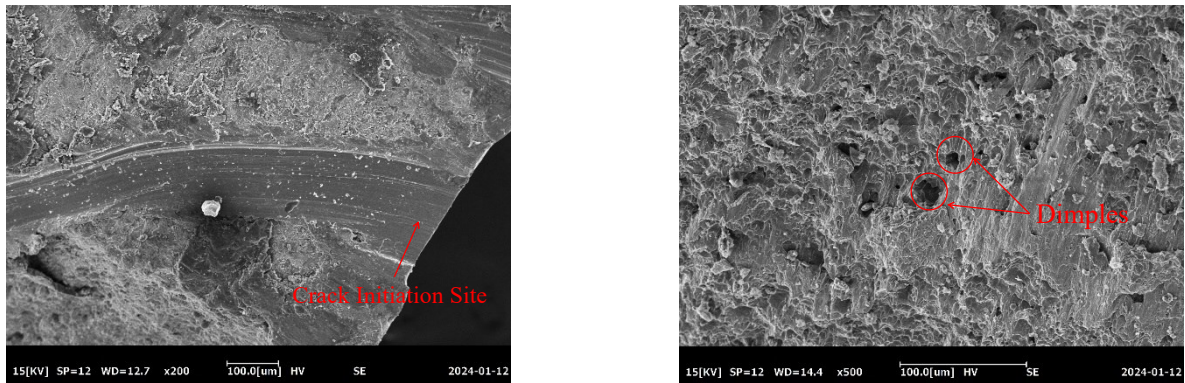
Fracture Surface under Uniaxial Tension
